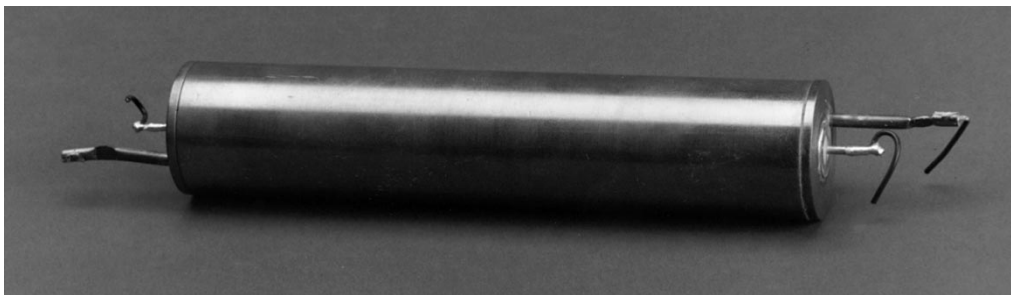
Hermetically-sealed resistor container assembly with glass-to-metal seals and copper purging tubes soldered to end plates.
